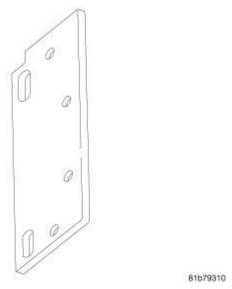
FRONT AND REAR SEAL TOOL - VM.9990 Courtesy of CHRYSLER LLC
